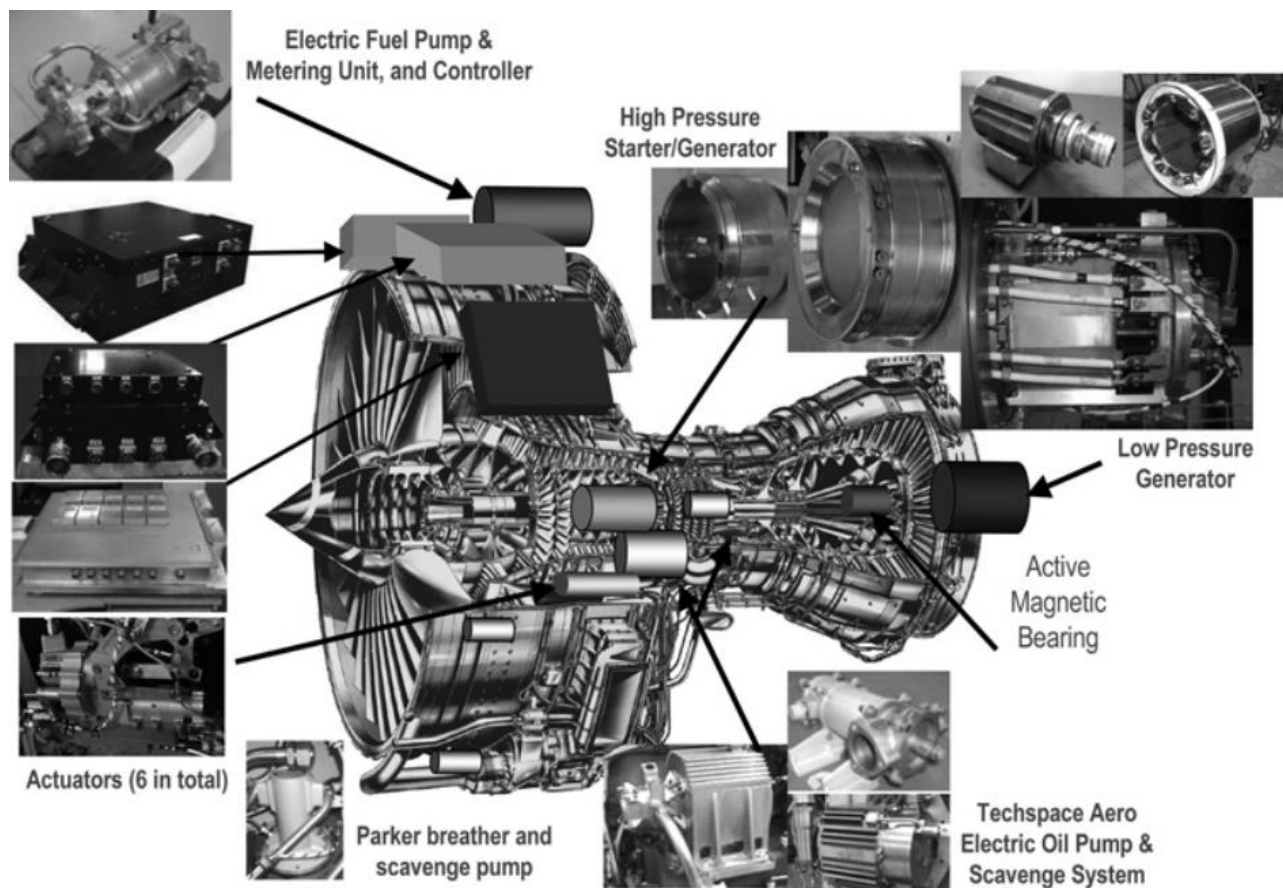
CAD drawing of gas turbine engine with electrical components to be integrated [3]
